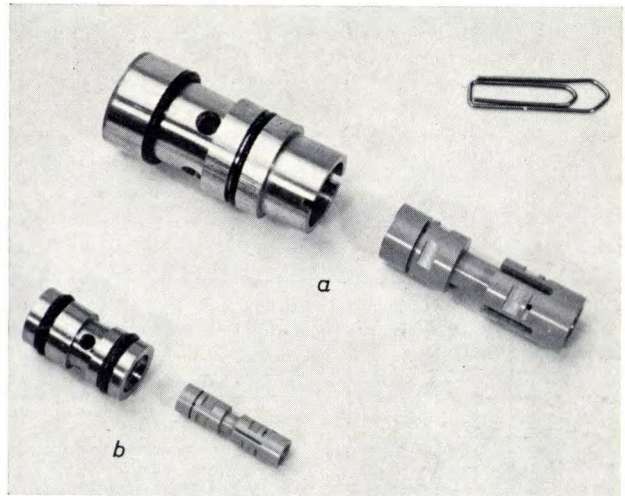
Piston and cylinder of two control valves incorporated in the precision lathe. a) Large version, diameter of piston 12 mm; b) small version, diameter 6 mm.
